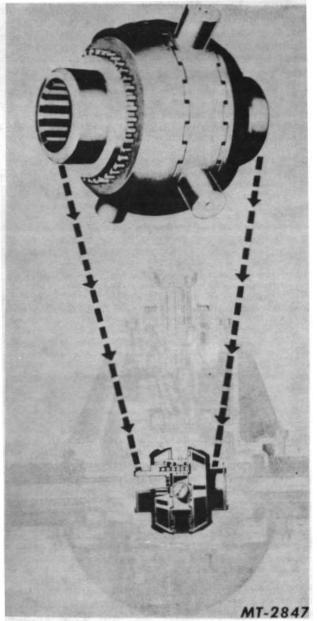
Typical Installation of NoSPIN Unit (Cross Sectional View)
